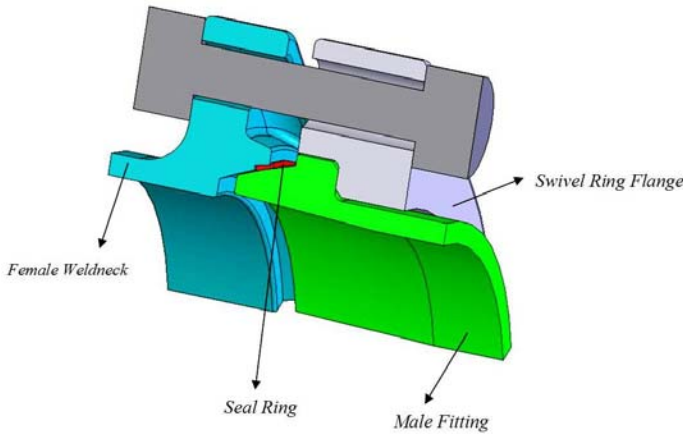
Section of 3-Bolt Misalignment Swivel Flange
